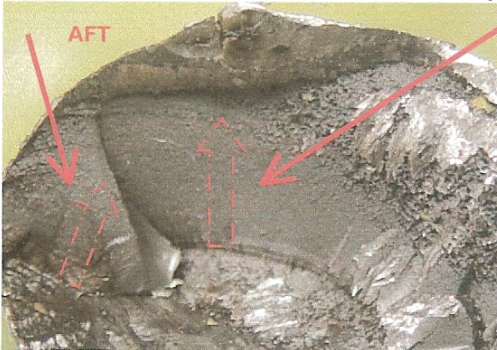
Fatigue fracture surface, AFT end (digital)
